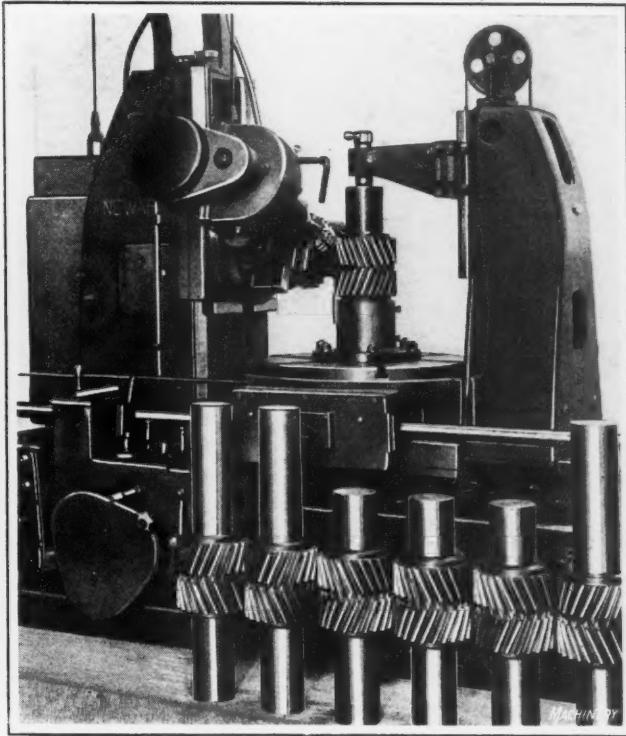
Cutting Herringbone Pinions that are Integral with their Shafts
